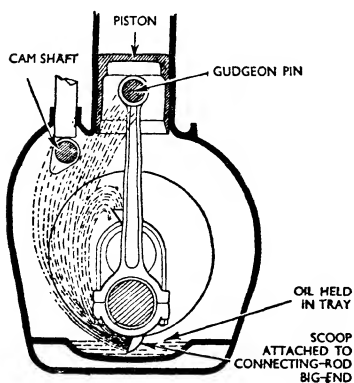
Diagram of splash lubrication system showing how oil is thrown up by the big-end on to the camshaft, gudgeon pin and other parts of the engine.
